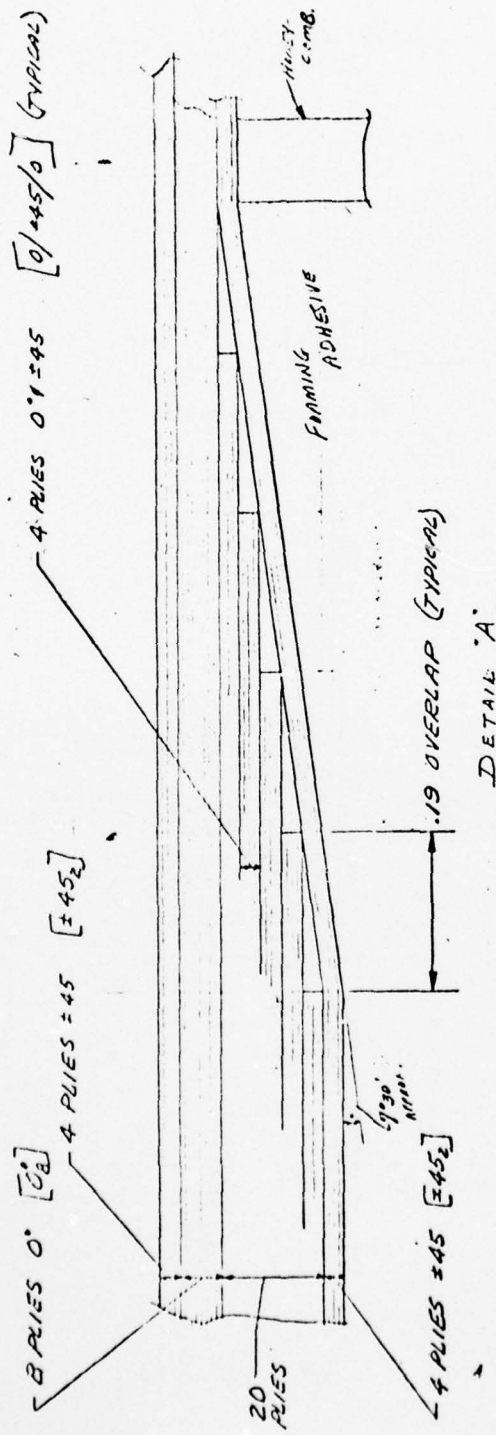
Z AXIAL LOAD SPECIMEN, DETAIL A
